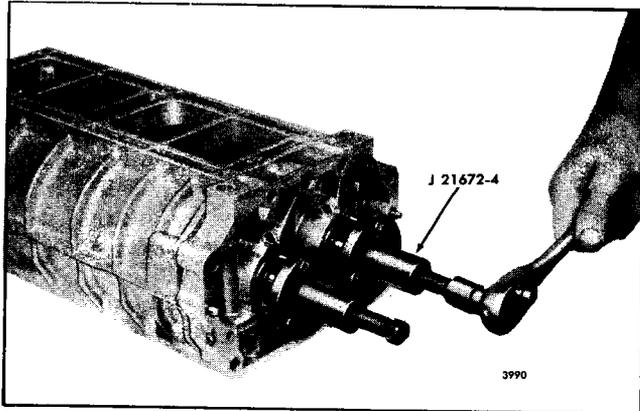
Removing Blower Rotors from Front End Plate Ball Bearings (Former Blower)
